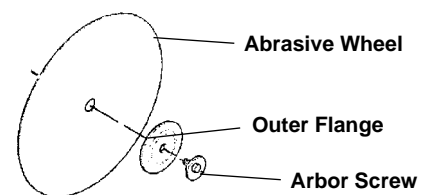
Position Of Arbor Screw, Arbor Washer and Outer Flange
